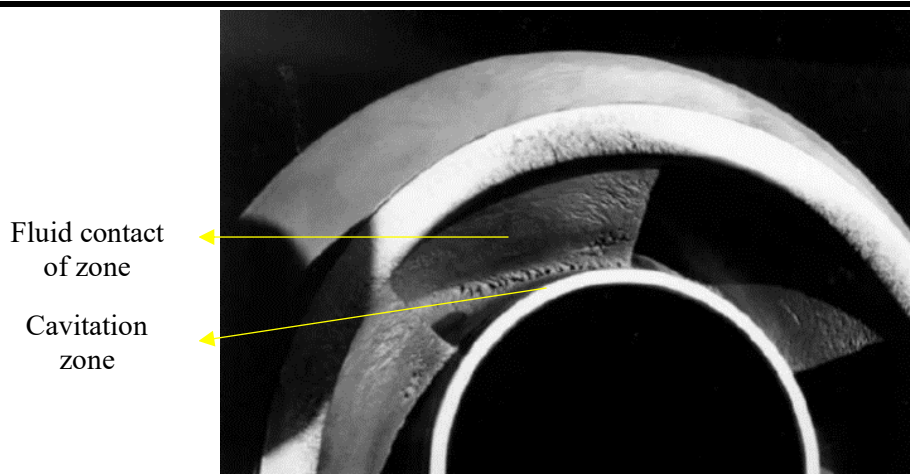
Cavitation Characteristics of the Centrifugal Pump Impeller of the TCU Casting Machine with 6 Impeller Blades.
